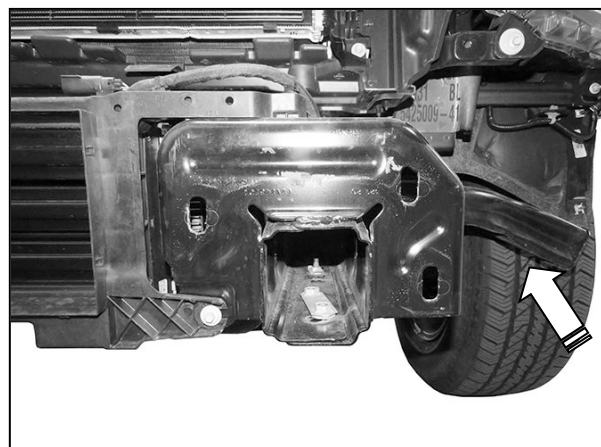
Hybrid Models Only, locate alert speaker behind driver/left side of bumper
